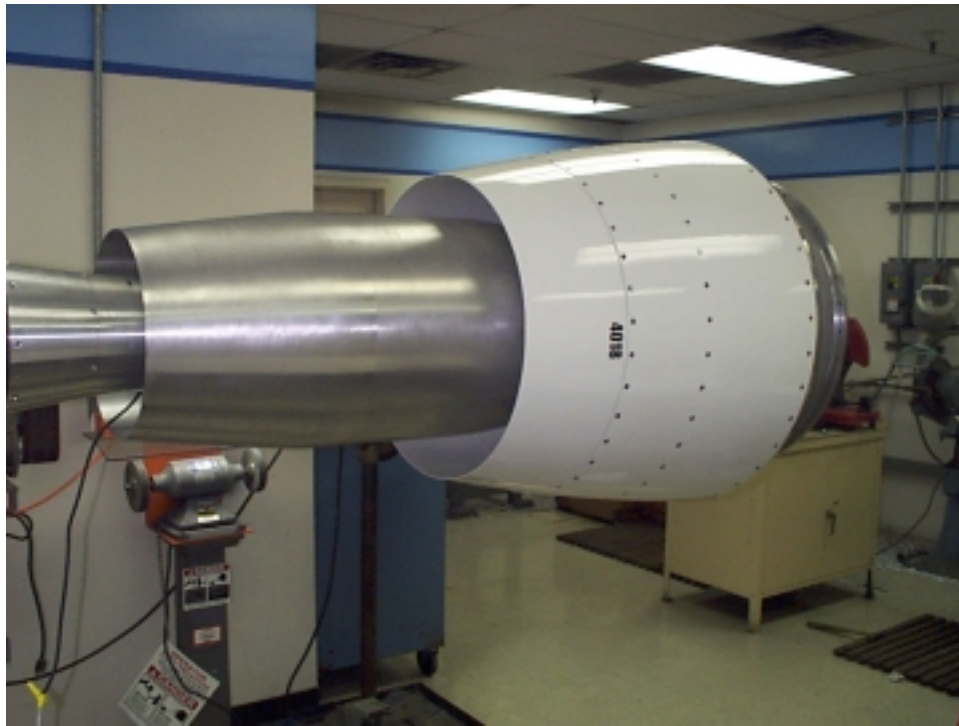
Nozzle Assembly and Nozzle Skins Installed.
